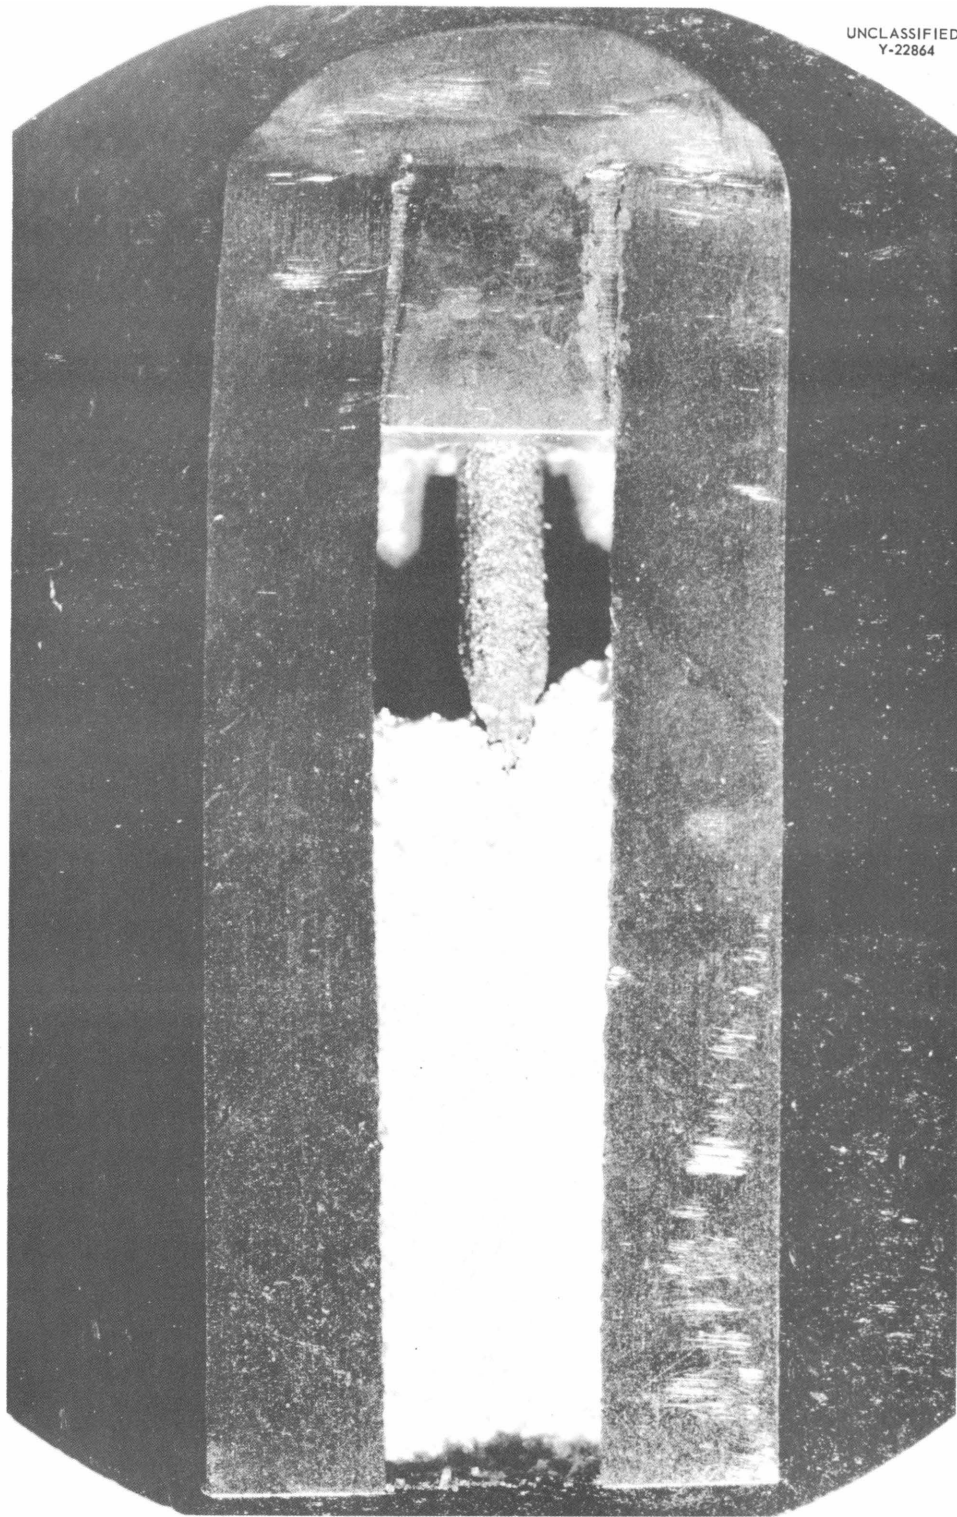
Cross-Section of Heliarc Closure Weld for 0.250-in.-O.D. Inconel-Sheathed Thermocouple Showing Inconel Filler Tip, One of Four Wires, Void Space and Magnesium Oxide Insulation.
